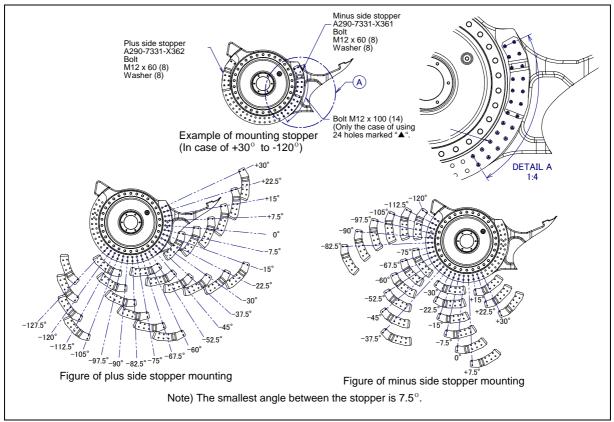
(e) Mounting of J3-Axis adjustable mechanical stopper (Option) (M-2000iA/1200/900L)
